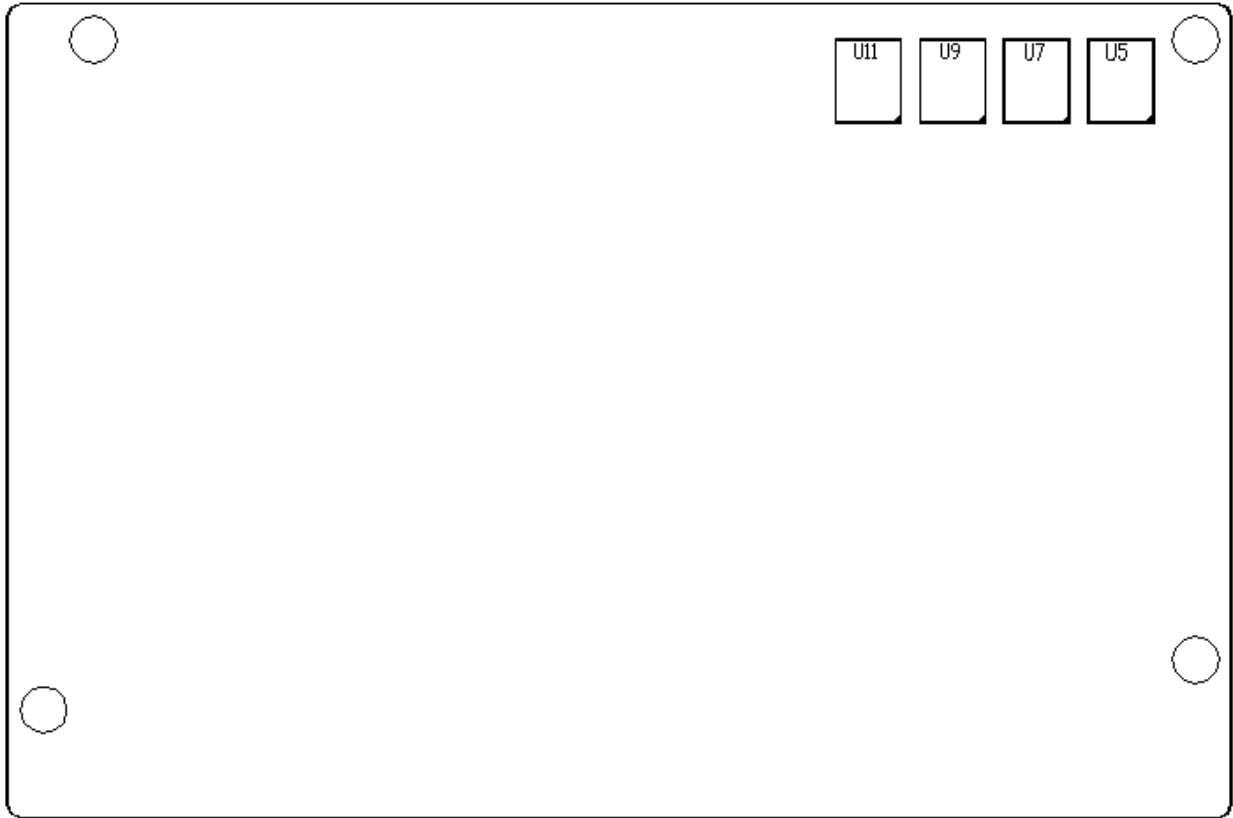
Jumpers and Connectors Location_ Board Bottom
